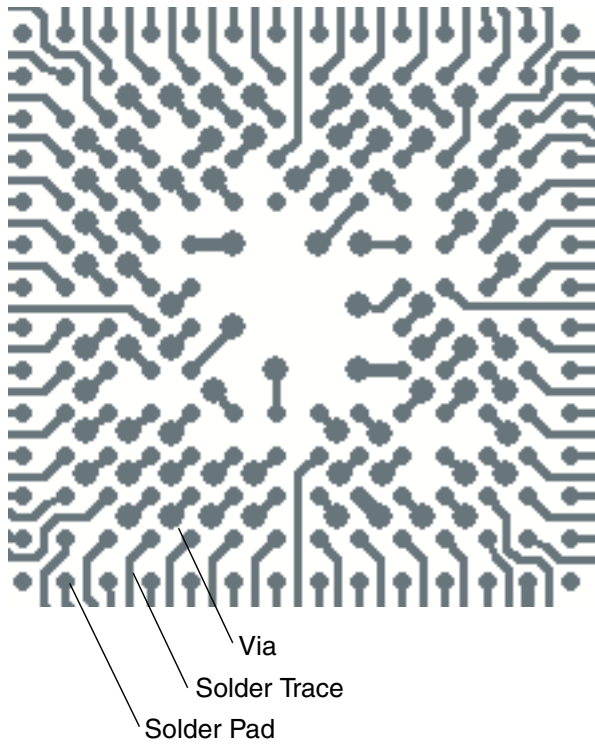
180-Pin μ BGA Six-Layer Board Routing Example (Four Routing Layers)—Component Side
